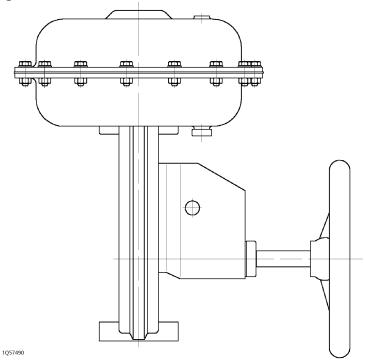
Side-Mounted Handwheel with Air-Retracts-Stem Actuator
